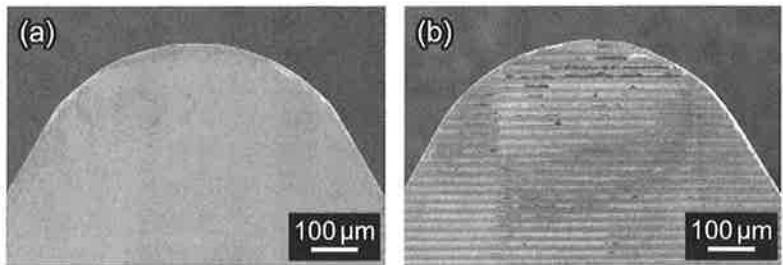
SEM images of the tool surface after cutting aluminum alloy under the wet condition. (a) DLC coated tool, and (b) DLC coated tool with textures.
